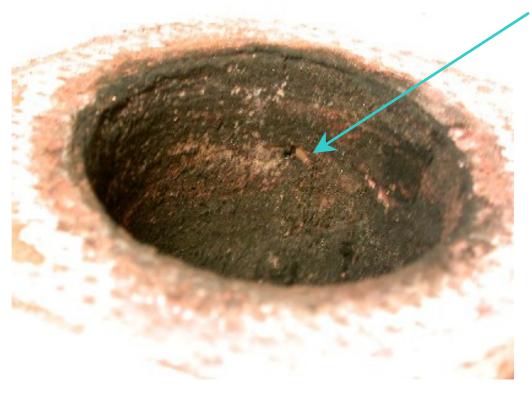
Internal view of single exhaust pipe at flange showing carbon soot coating and pipe hole (arrow).
